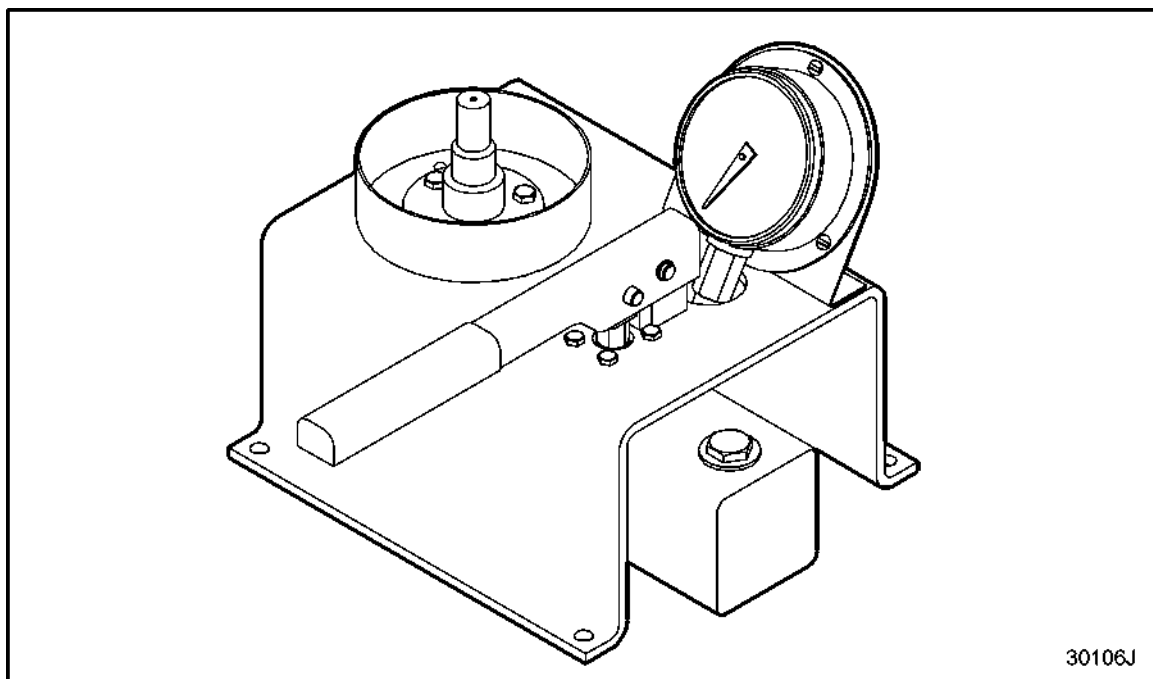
Injector Tip Assembly Tester, J 22640-A
